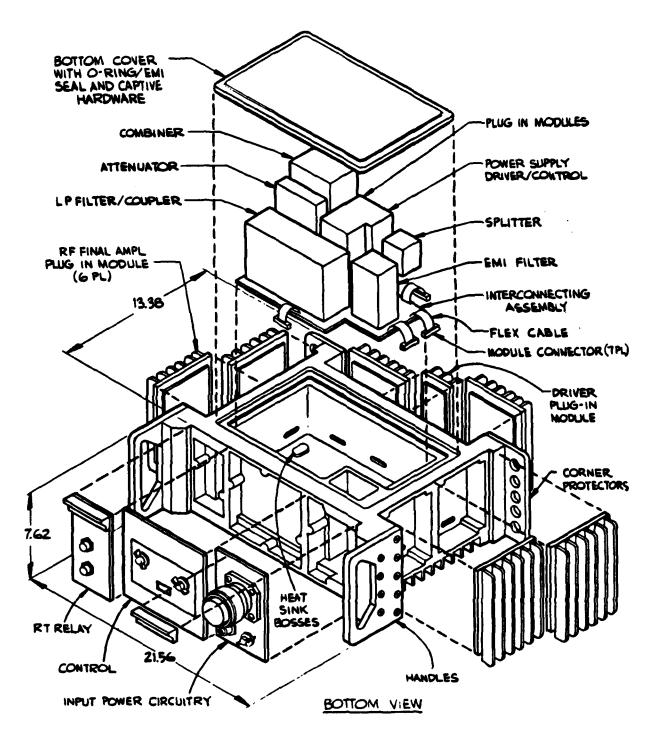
Power Amplifier Exploded Bottom View
